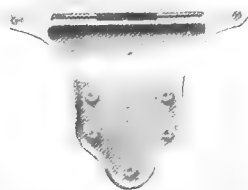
Baggage Car Sliding Door Hanger James L. Howard & Company.
